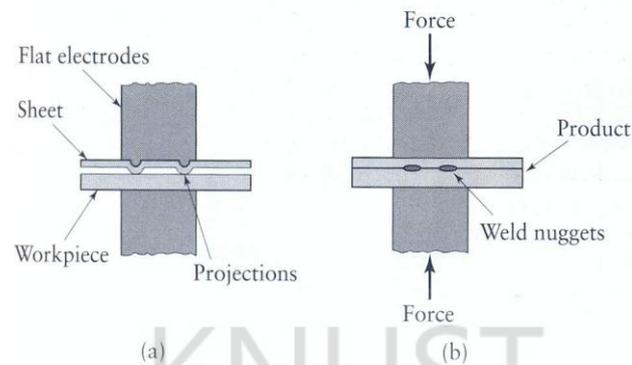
RPW (a) before and (b) after, weld nugget formed at the projections (Groover, 2002).
